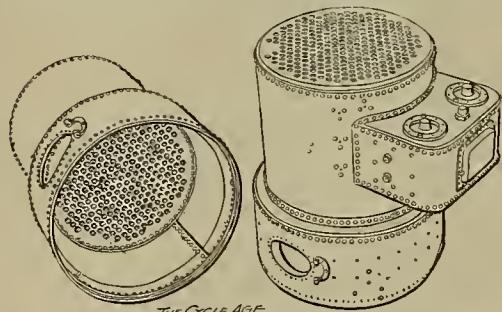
Boiler shells, one complete and one lacking flues and steam chamber.
